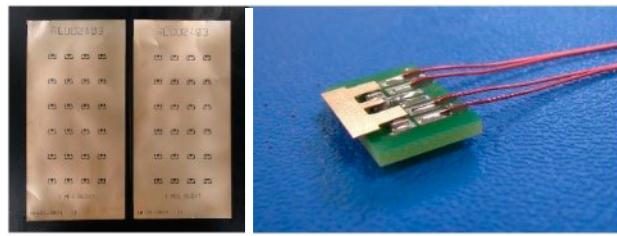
Chemical milling. A singulated chemically milled 0.005-in.-thick beryllium copper is bonded onto a PCB using a thermally conductive, electrically insulative epoxy.
